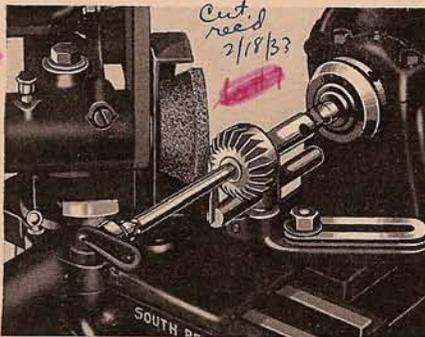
Sharpening a Valve Seat Reamer using Holding Fixture with Spring Stop.
